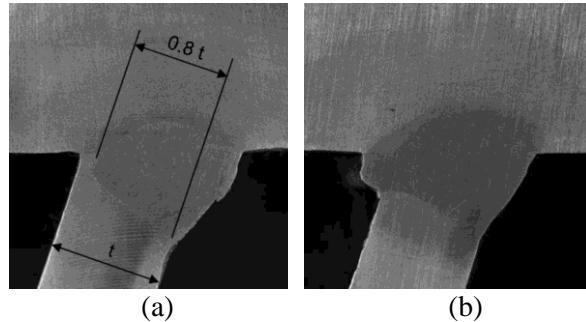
CSV of welded specimens; (a) %80 PJP weld, (b) % 100 penetration weld [16]
